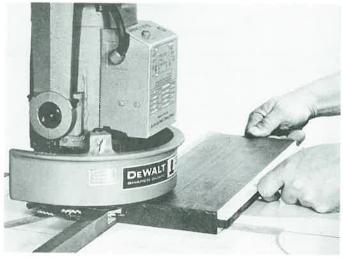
Cutting the groove with a radial arm saw and dado blade. (*DeWalt Industrial Tool Co.*)
